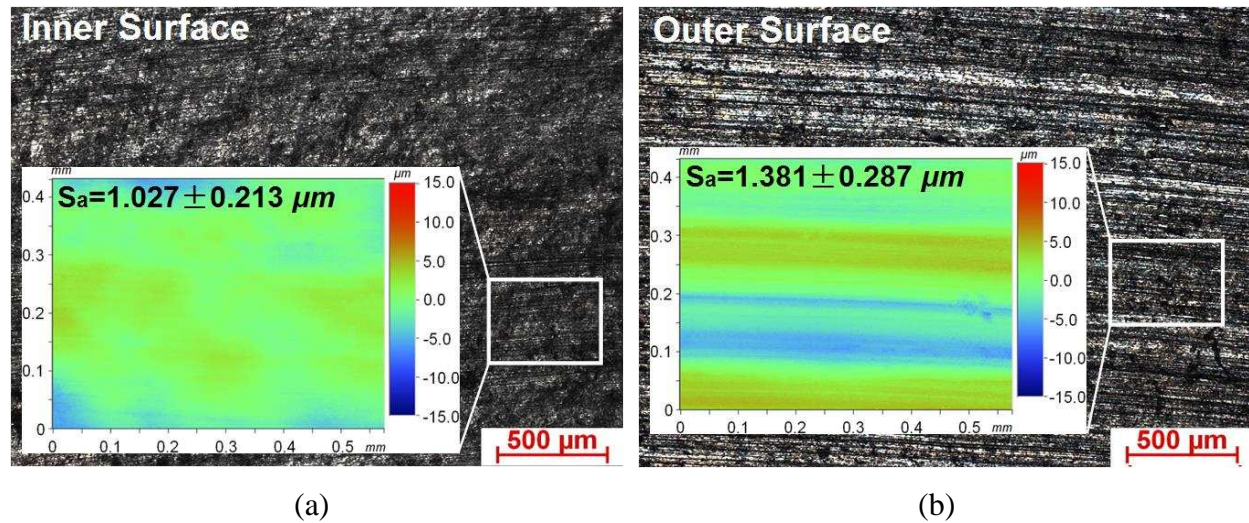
Surface finish of components formed in E-SPIF with rigid tool: (a) inner surface and (b) outer surface
